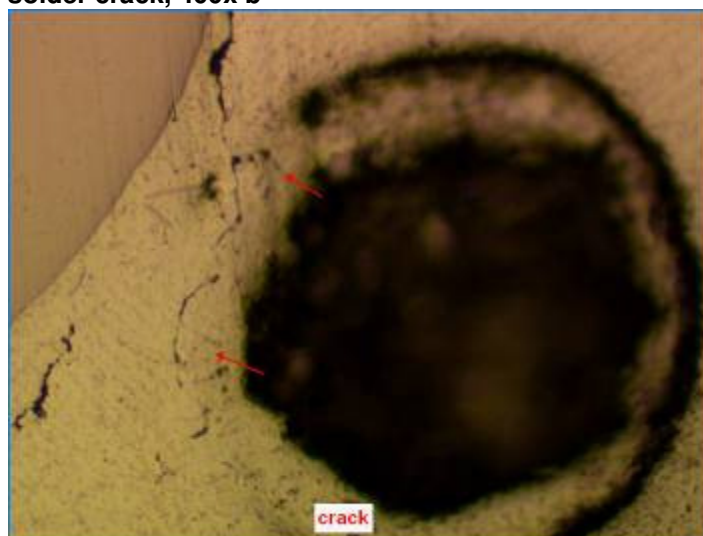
cross section, SN62, U61, left lead solder crack, 400x d
